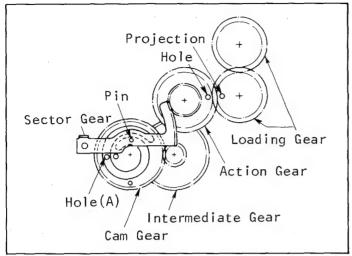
Adjustment of Cam Gear and Mode Select Switch - (5)
